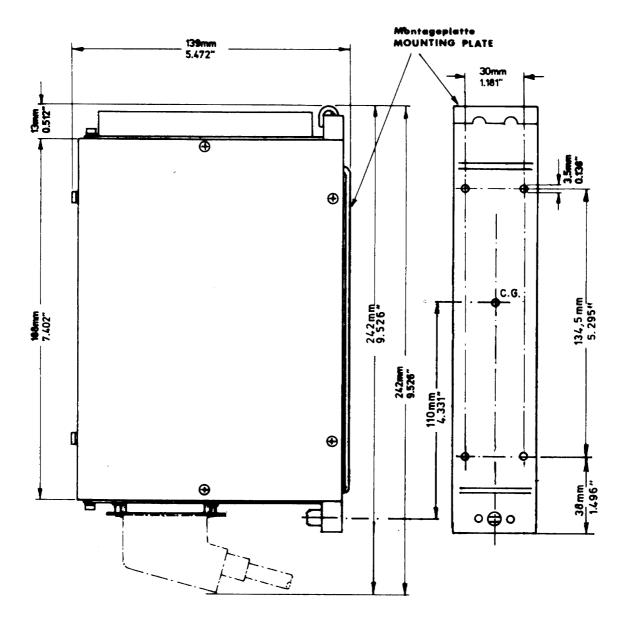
Dimensions AC 3503 - () / AC 3504 ()
